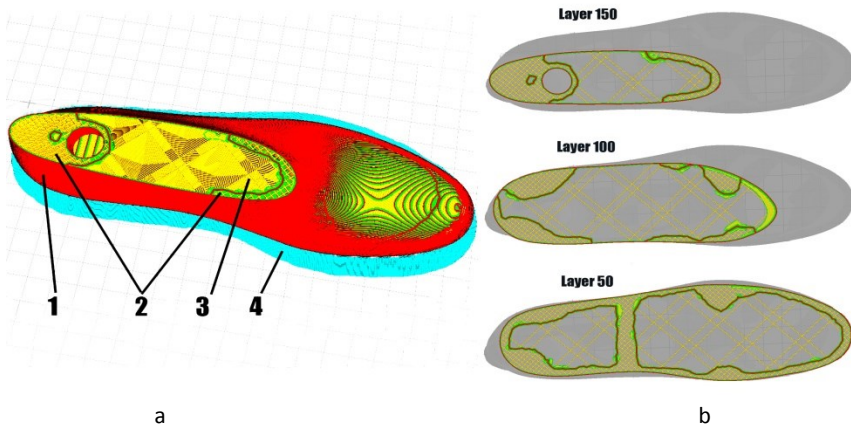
a) Sectioned model ready for 3D printing 1 – exterior structure; 2 – dense infill; 3 – sparse infill ; 4 – support structure; b) Layer sections of the sectioned model
